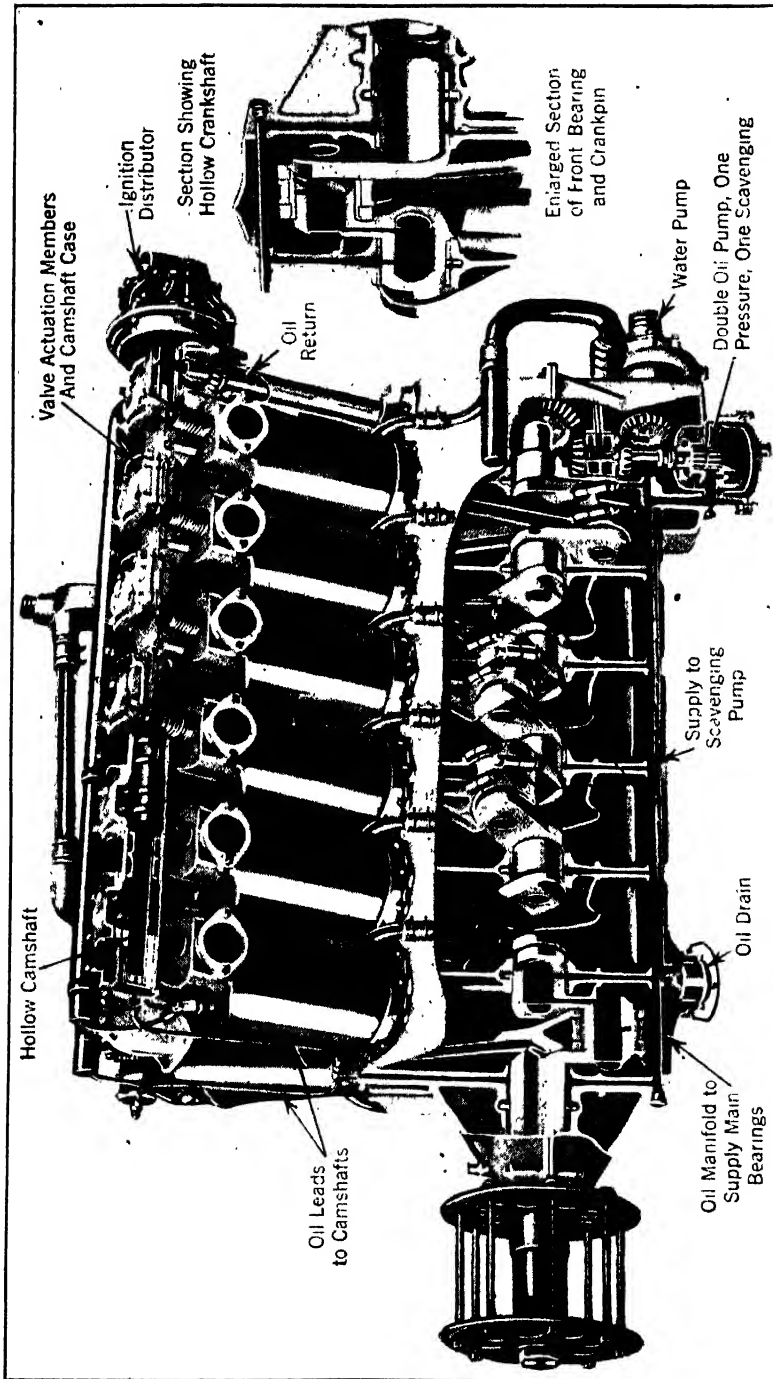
Oiling System of Liberty Aviation Engine Operated on Dry Sump Principle, Oil from Pressure Pump Going to Bearings and Camshafts, the Oil Spray Thrown off by Crankshaft Lubricating Interior Walls of Cylinders and Other Parts. Suction Pump Draws all Oil from Crankcase.
